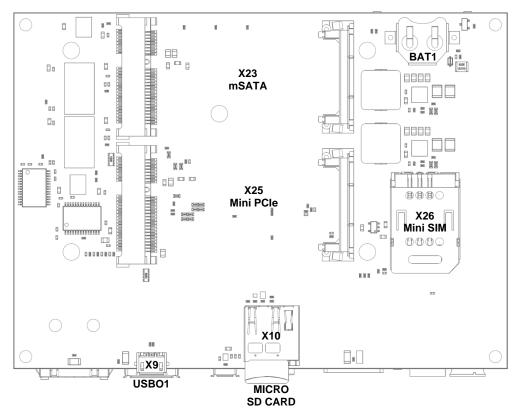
Ixora Carrier Board Connectors - Bottom Side
